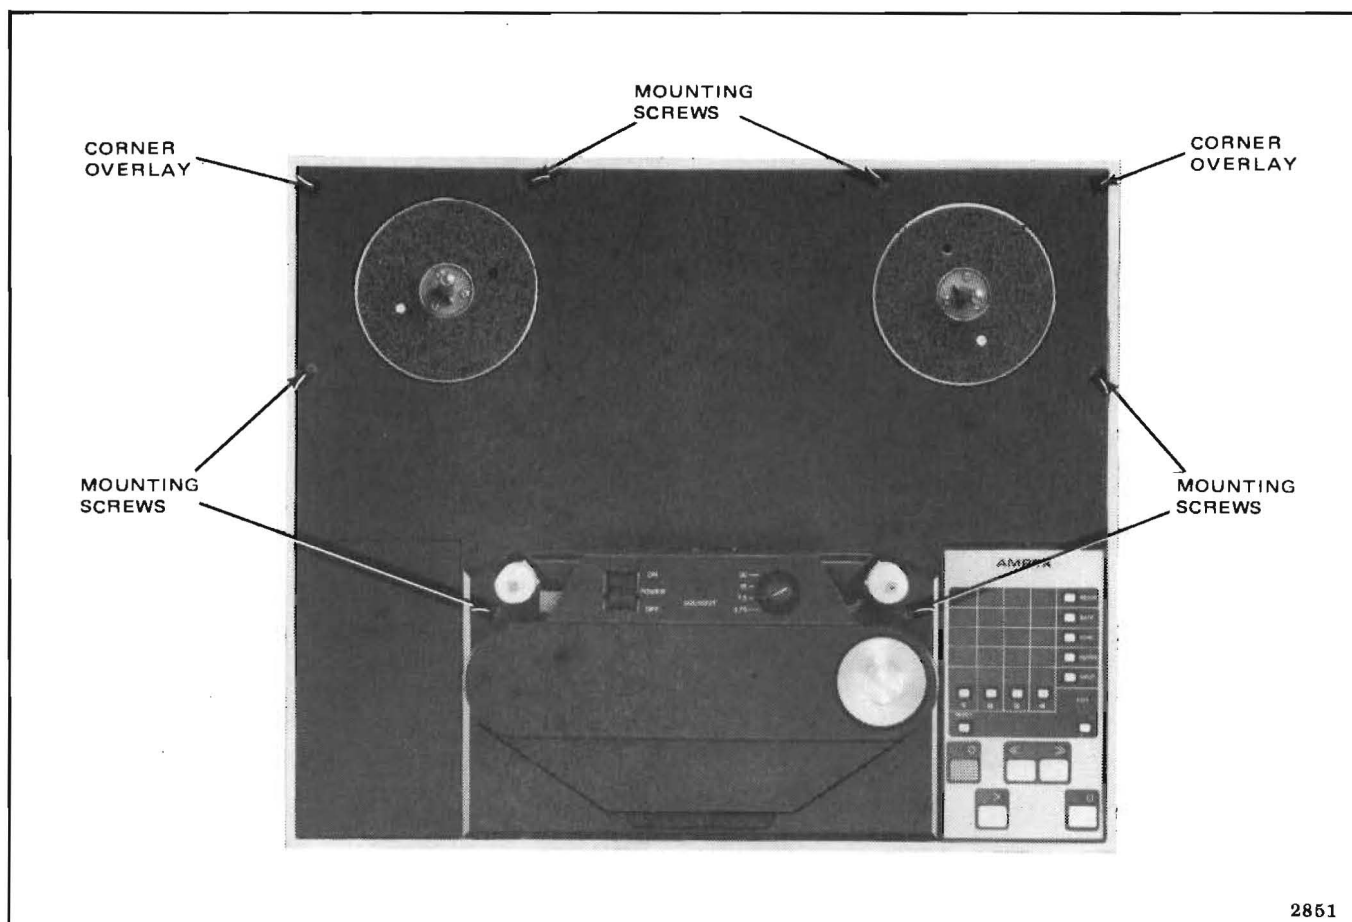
Rear Overlay Panel, Six Mounting Screws
